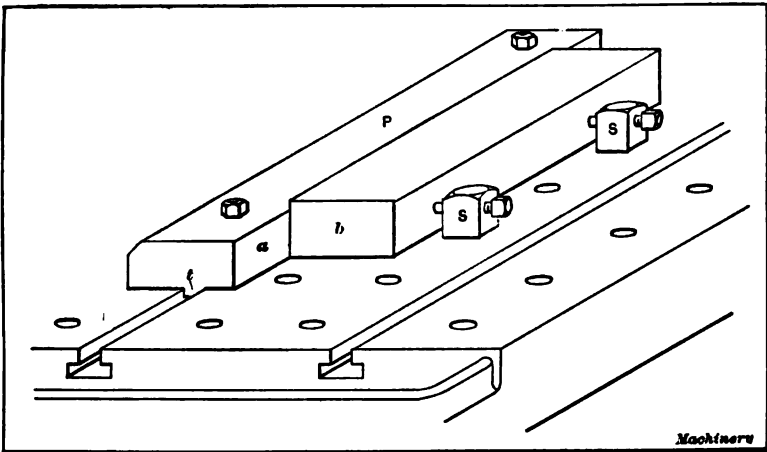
Work held between Stop-pins and Strip Bolted to Platen
